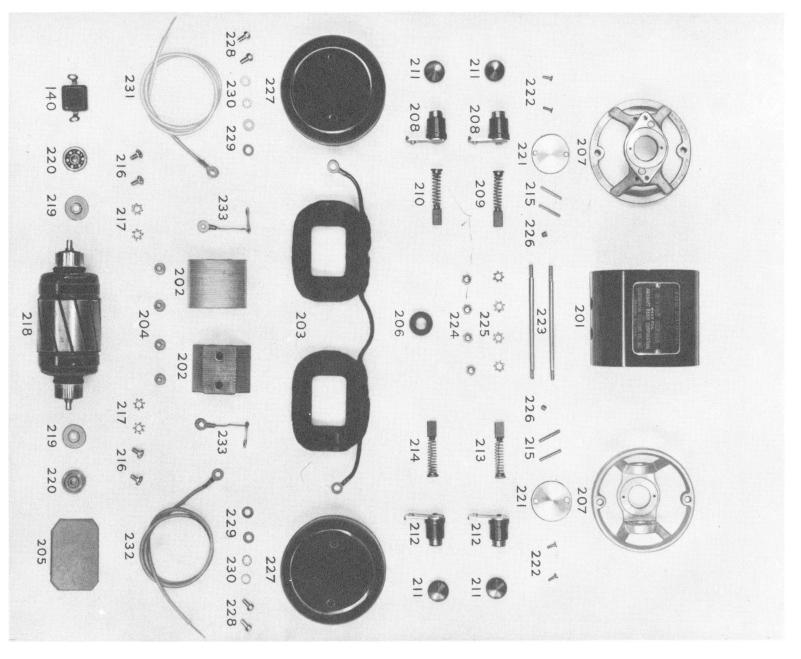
Parts of Dynamotor for Type CBY-21400 Receiver Dynamotor Unit
